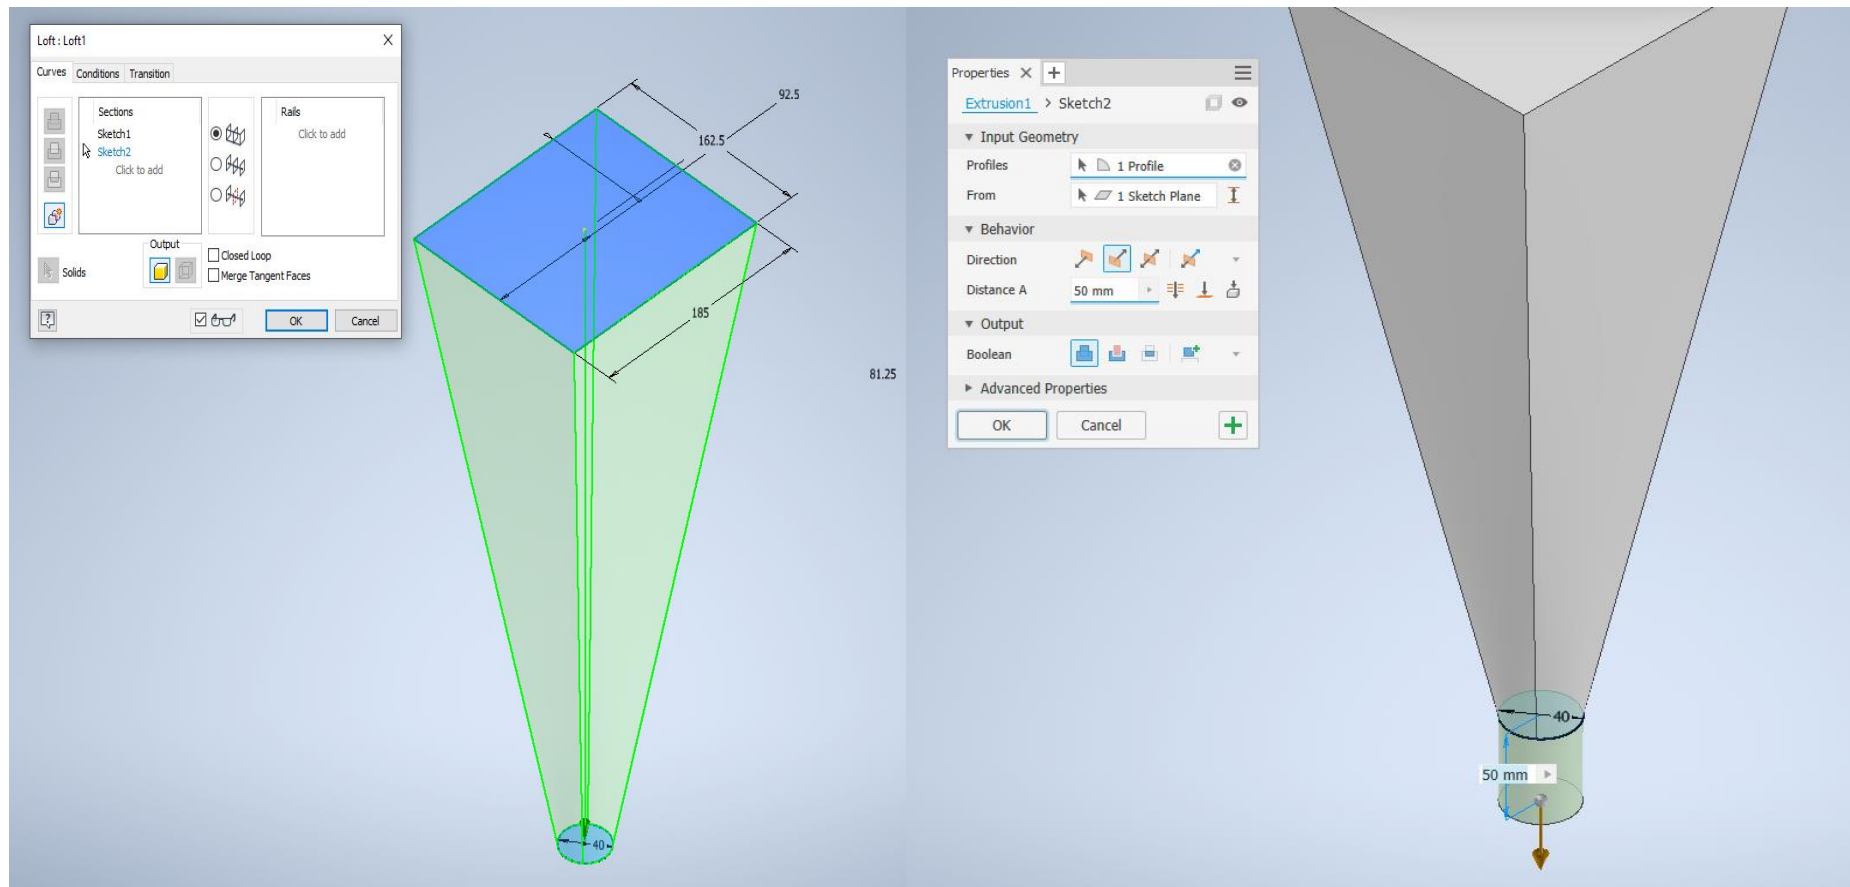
Designing chute section of the collecting bins section for Chamber 2 using the “Loft” and “Extrude” tools.
